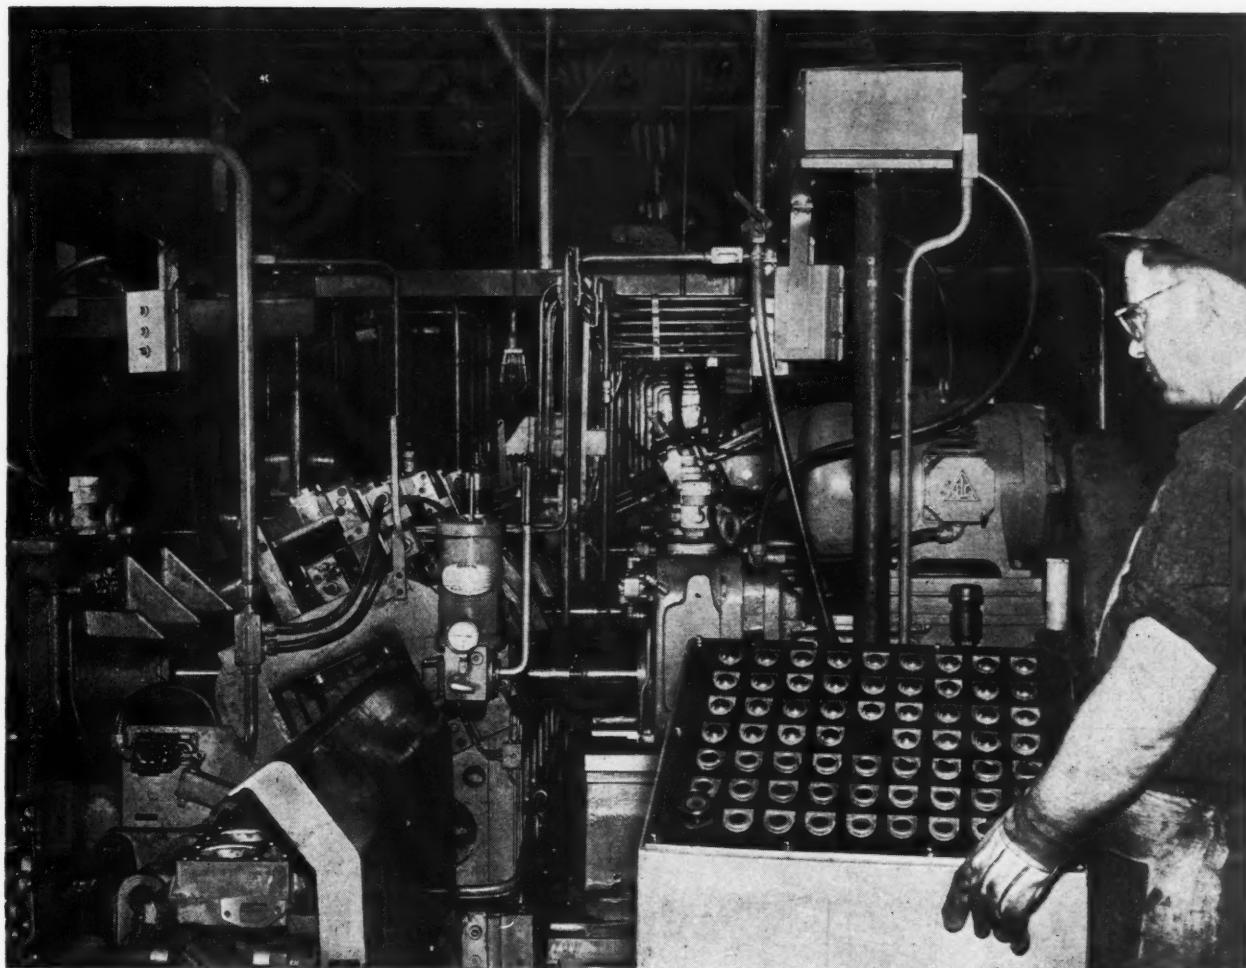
Eight spark-plug holes in each cylinder head are drilled, reamed, counterbored, tapped, spot-faced, and chamfered on a ten-station transfer machine containing 103 spindles
